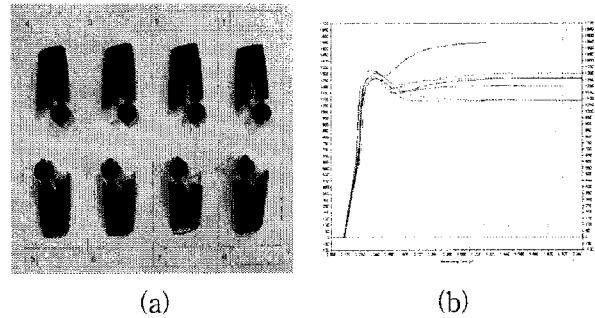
Experimental example of unbalanced filling for part thickness of 500 μm and 8cavity layout injection molding system
